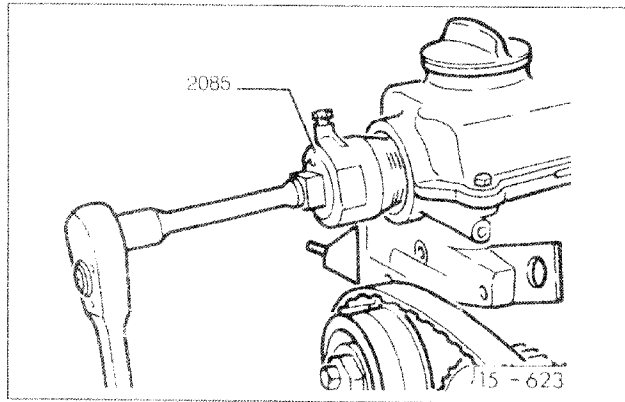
Oil seal extractor being used to remove camshaft oil seal.
